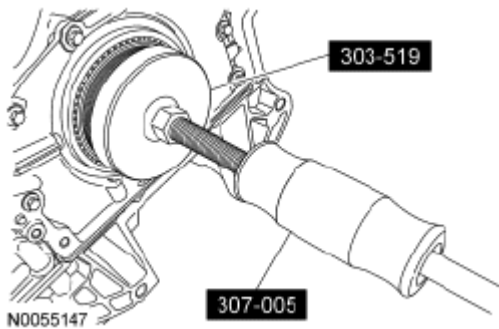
Identifying Crankshaft Rear Oil Seal Remover And Slide Hammer
